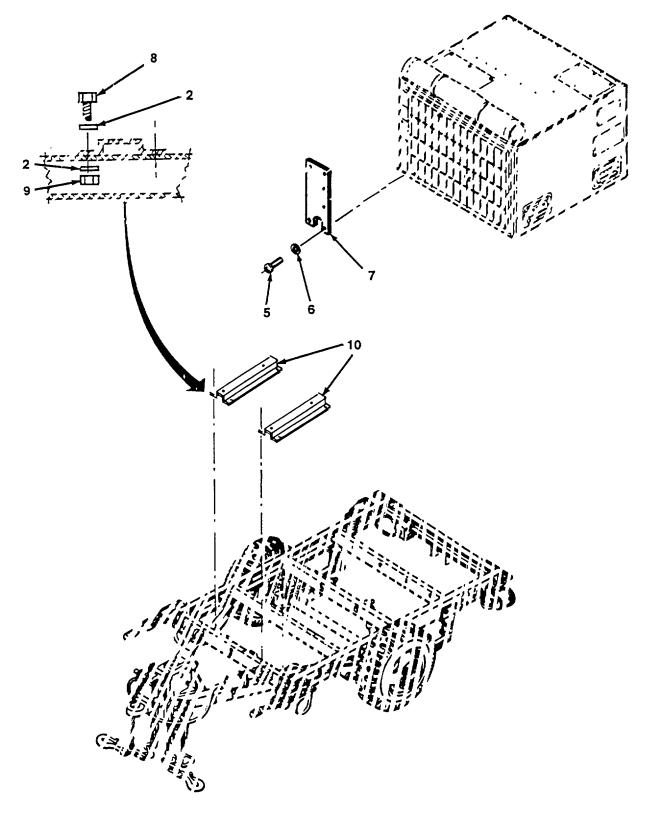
Air Conditioner and Mounting Rails (Sheet 2 of 2).
